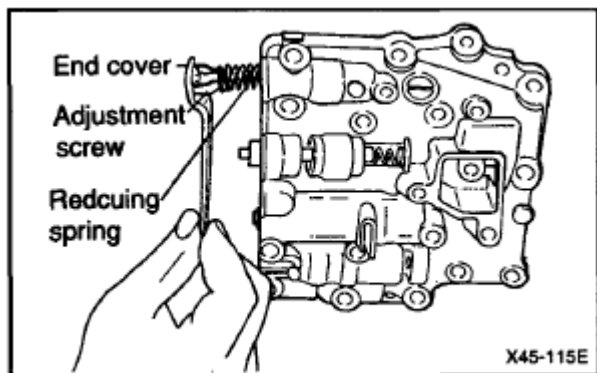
Removing End Cover, Adjustment Screw, & Reducing Spring
